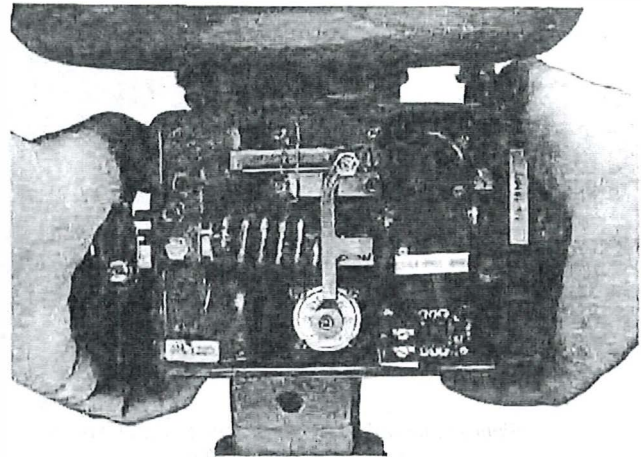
Pressing the Feedback Lever Assembly Bushing into the Positioner
